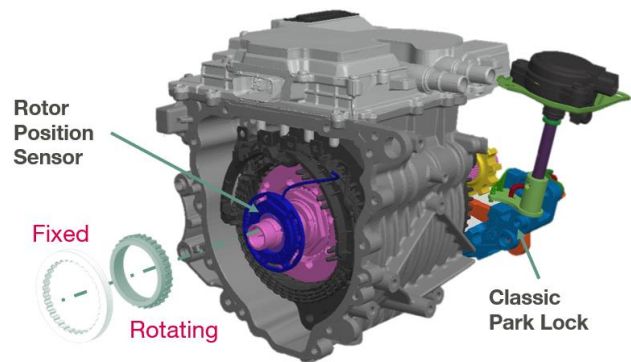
Relocation of the park lock out of the reducer into the rotor shaft end by an axially moving multi-tooth locking element
